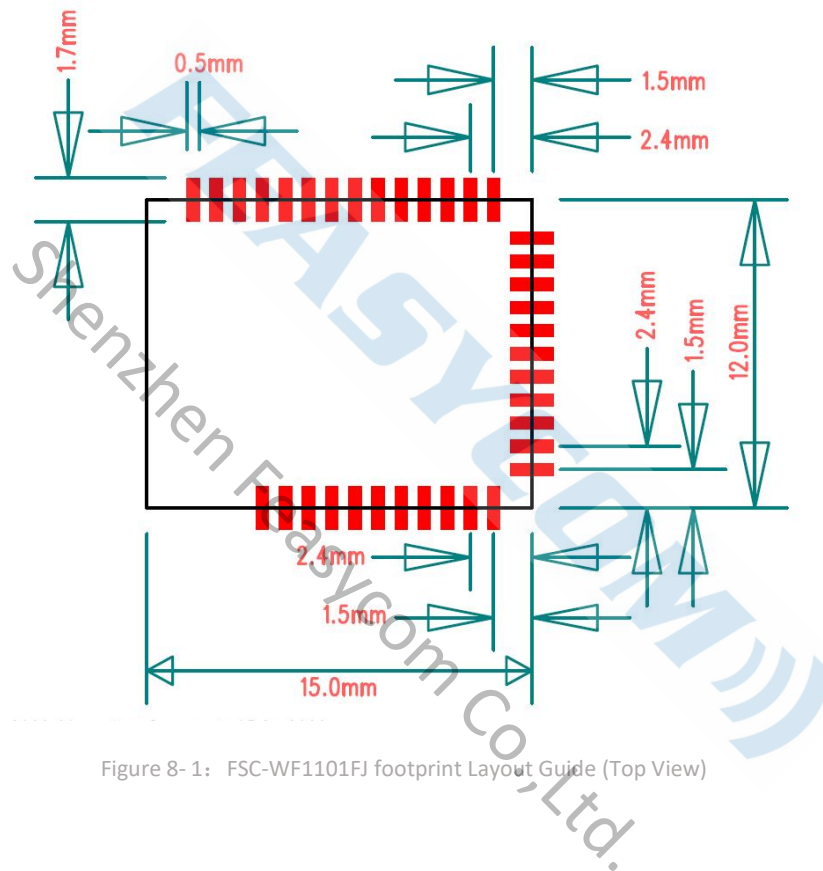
1: FSC-WF1101FJ footprint Layout Guide (Top View)
